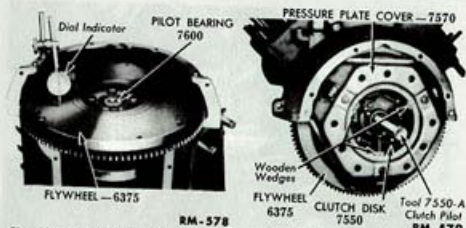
Checking Flywheel Run-out With Dial Indicator
